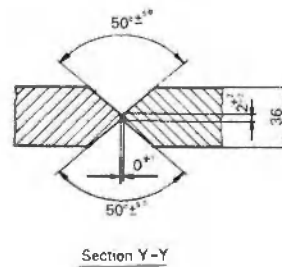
FIGURE FOR ASSEMBLY OF ENDS (TOP VIEW)
